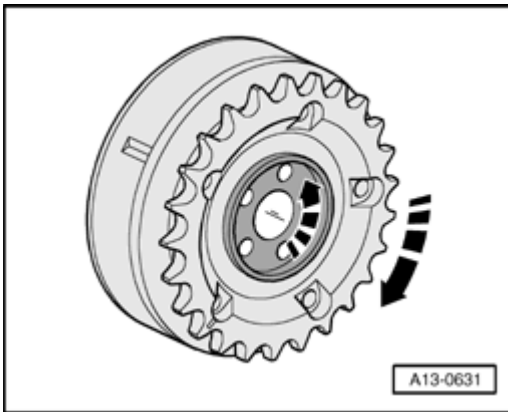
Rotating Inner Part And Outer Part Of Both Camshaft Adjusters Against Each Other Up To Lock Position
